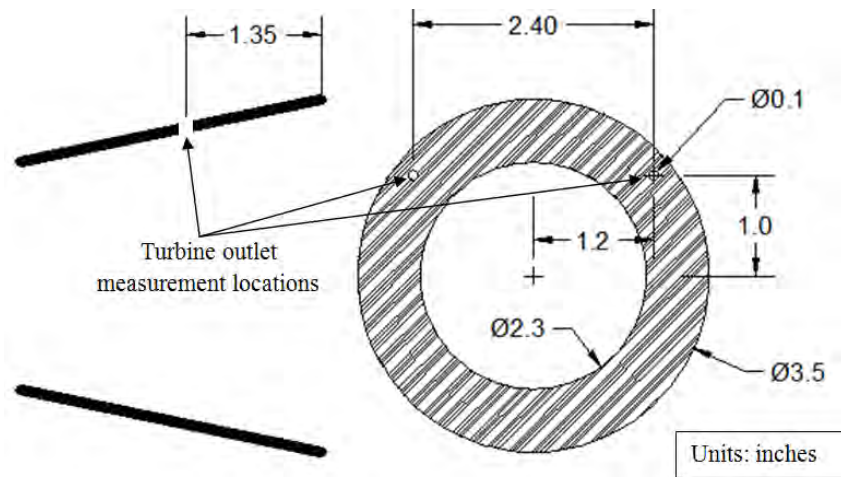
Schematic of JetCat nozzle with dimensions and locations of turbine outlet measurements for turbine-RDE testing
